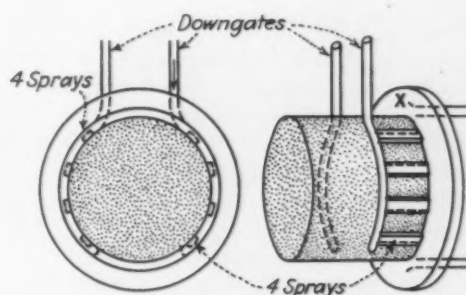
This enlarged view shows the arrangement of sprays for the de-aerator casting illustrated in detail in Fig. 10.
